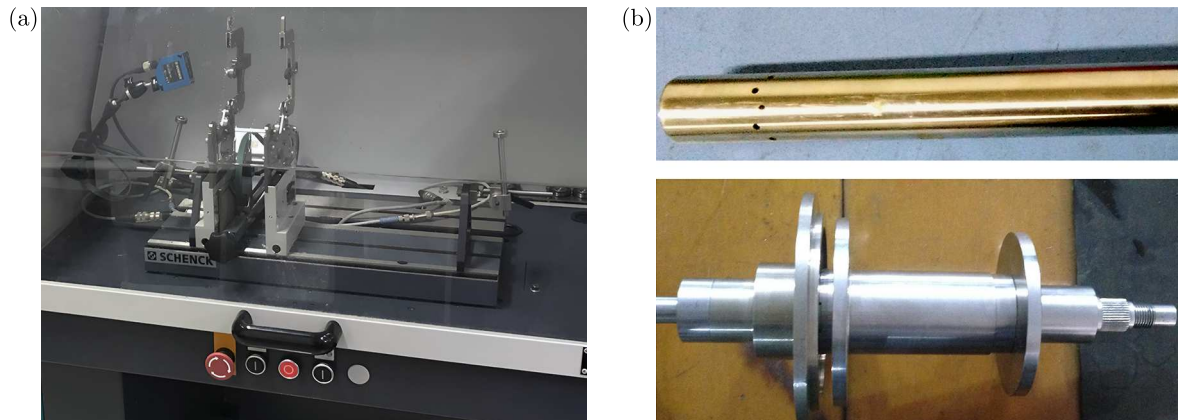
Dynamic balancing experiment: (a) dynamic balancing machine, (b) motor rotor and compressor-turbine rotor
